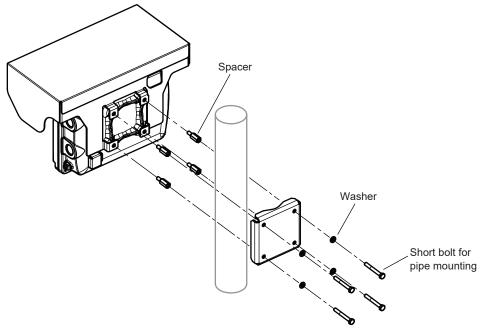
Pipe mounting when a sun shield is used (vertical mount example)
